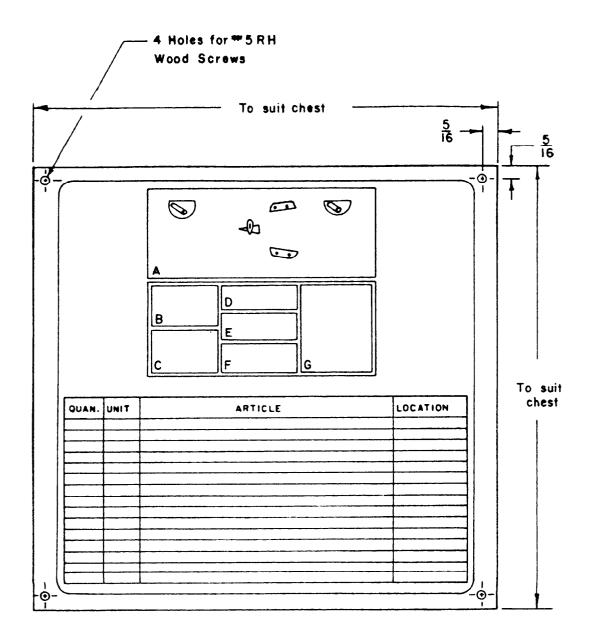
LOADING PLAN FOR CHEST PLASTIC
